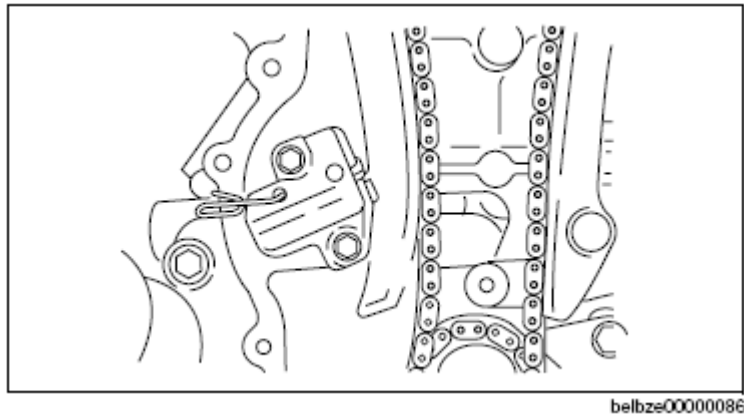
Identifying Chain Tensioner And Retaining Wire
